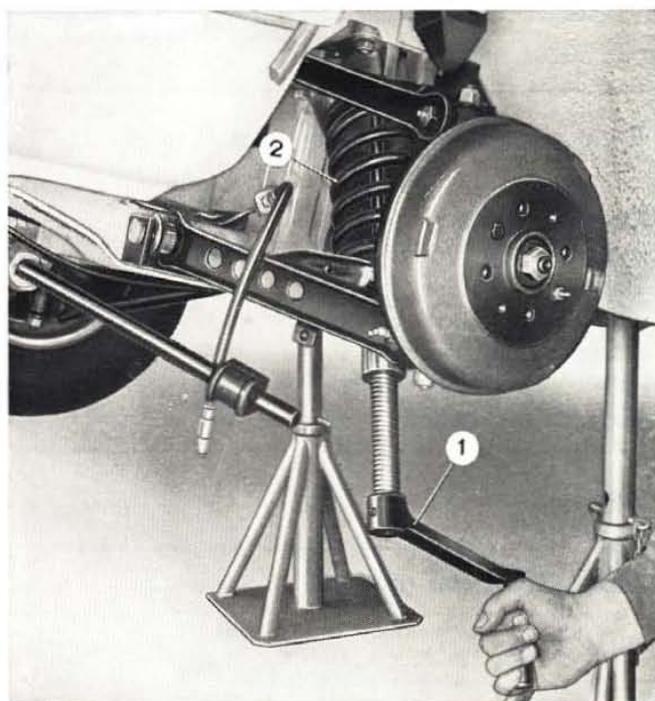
Compressing coil spring as a preparatory step to suspension removal.
